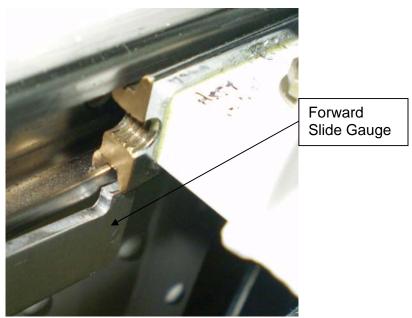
Checking with the Forward Slide Gauge (all four corners require checking)
